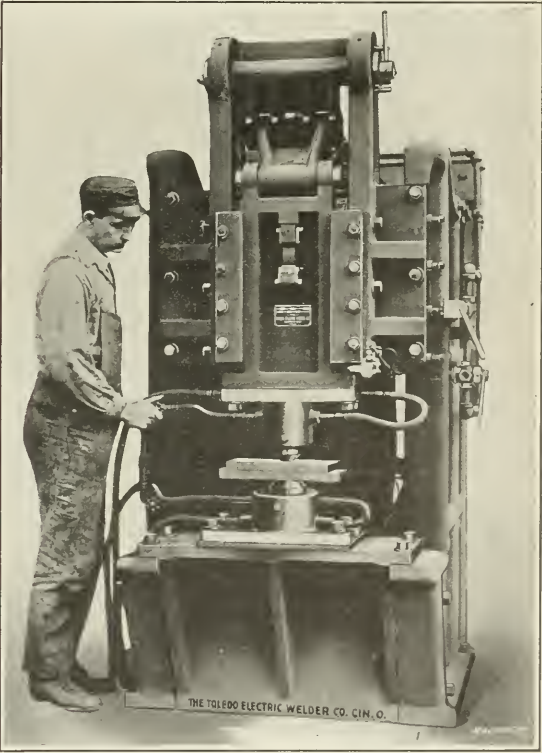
Special Toledo Electric Spot-welder having a Capacity to weld Two Plates each 1 1/4 inch Thick and applying Hydraulic Pressure for operating the Upper Electrode
